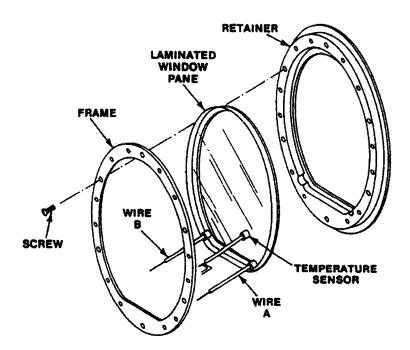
Exploded view of the window subassembly shown in Fig. 5.5. (Courtesy of Goodrich Corp., Danbury, CT.)
